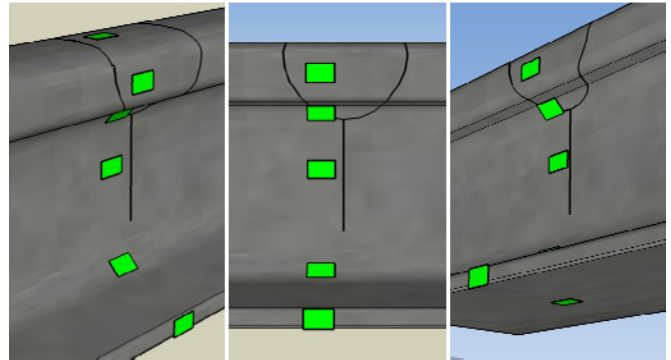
Illustrative Views showing Placement of Strain Gages for a Railhead Repair Weld
